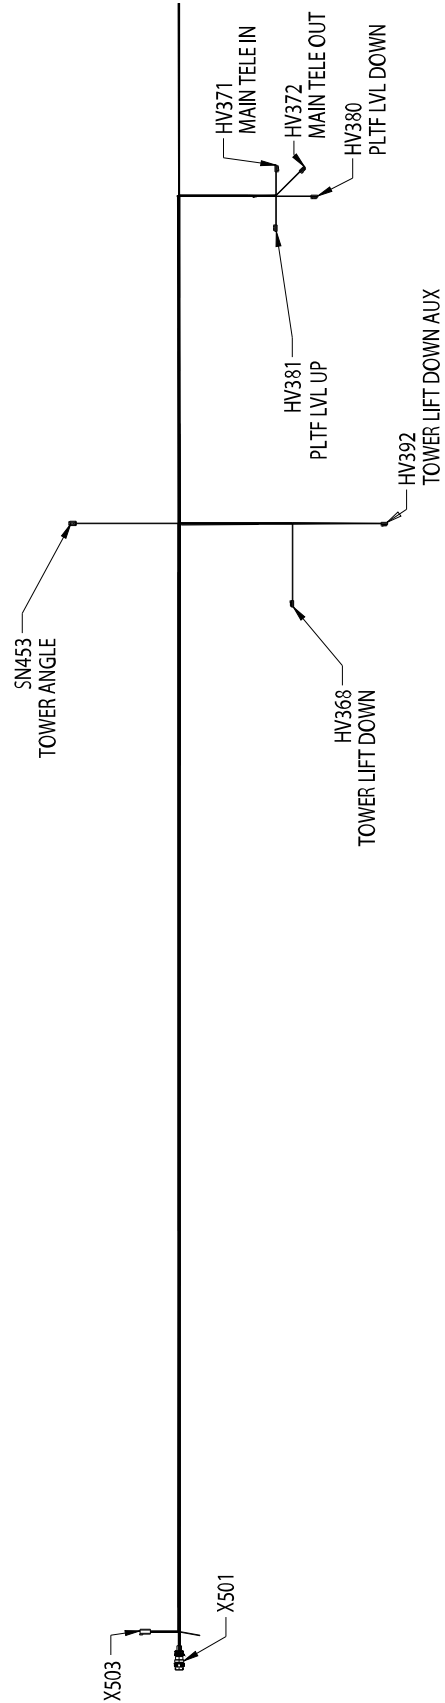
Tower Upright Valve Harness - Sheet 2 of 4
